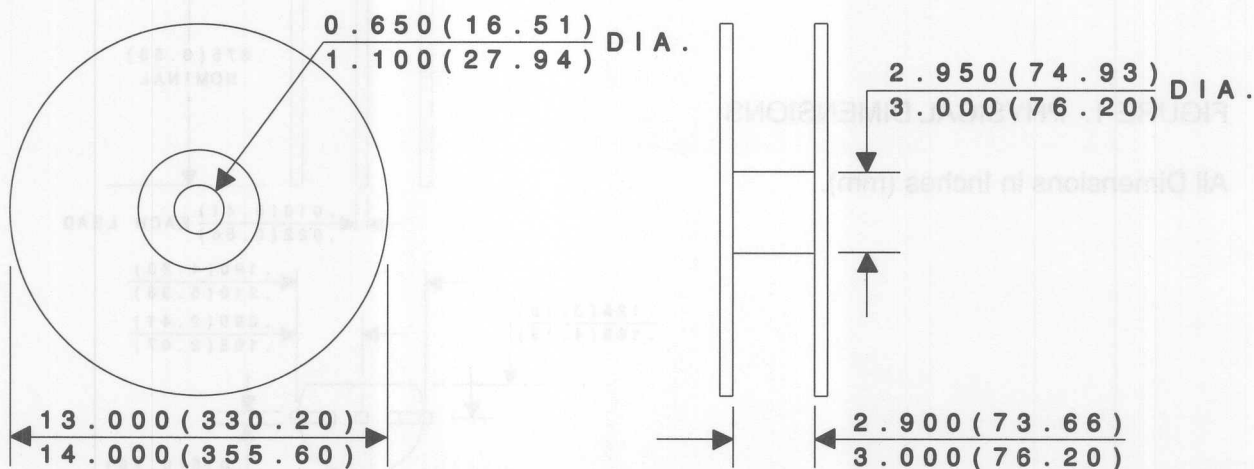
Reel Dimensions [All Dimensions in Inches (mm)].
